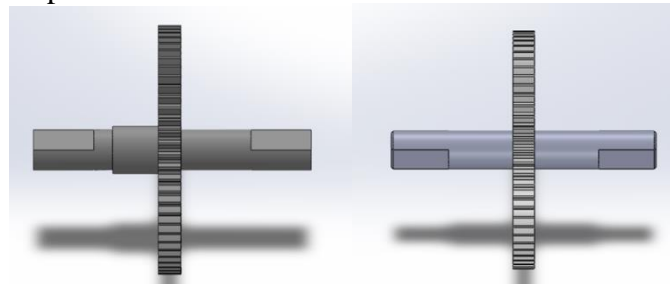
Center Gear Shaft from Project #1(left) and Project #2(right).
